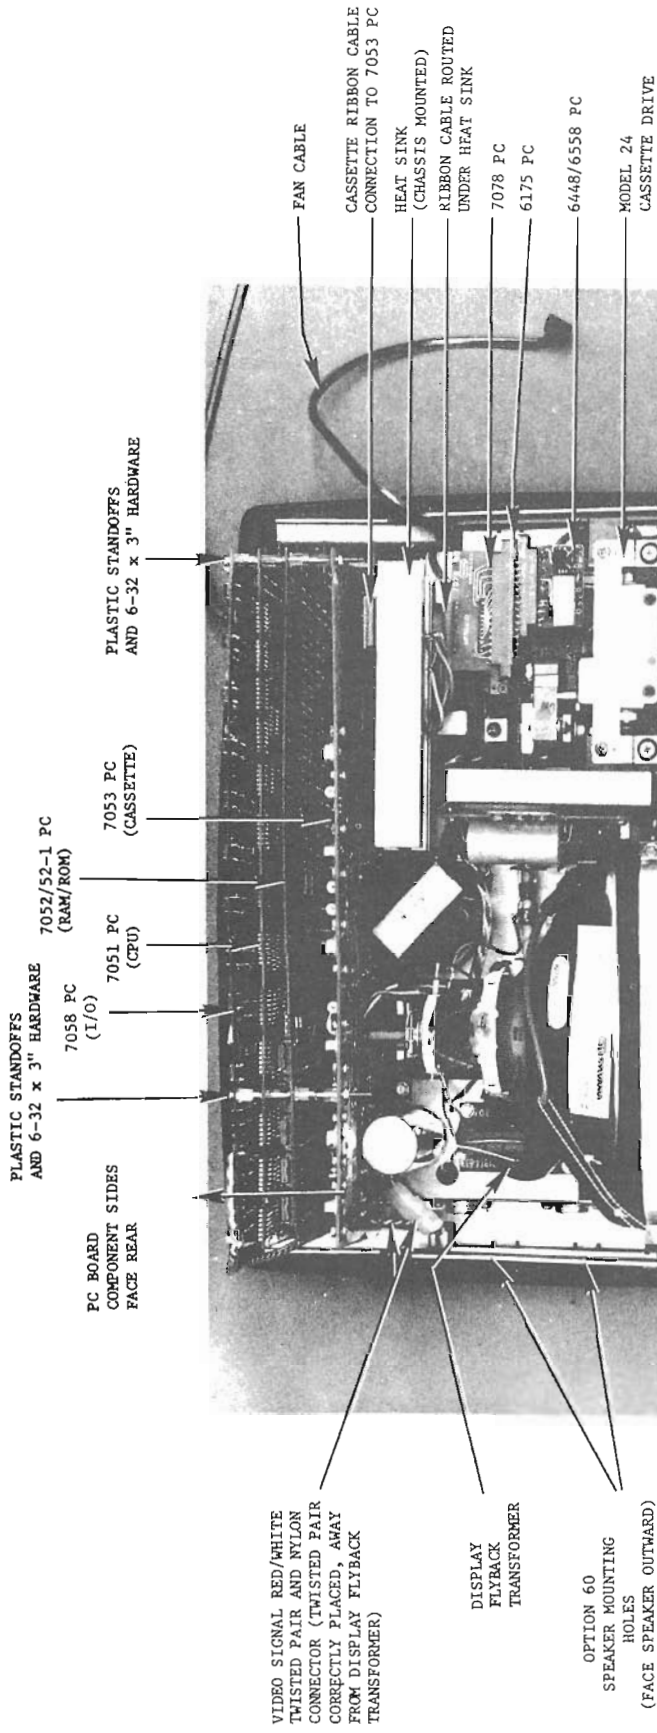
2200E; TOP VIEW/COVER REMOVED
